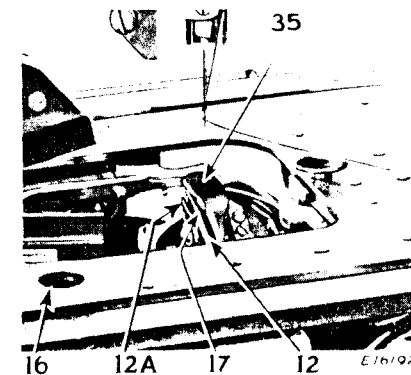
View of Machine, Showing Under Thread and Cord Trimmer
